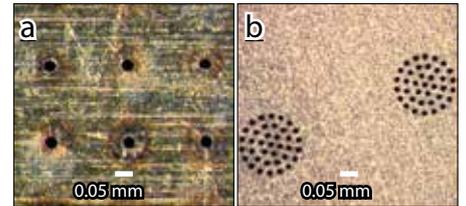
Laser hole drilling on SS304. (a) percussion drilling through 40 µm sheet (100 pulses, 4ms per hole); (b) hole array machined in 0.4s thanks to fast scan mirror beam control
